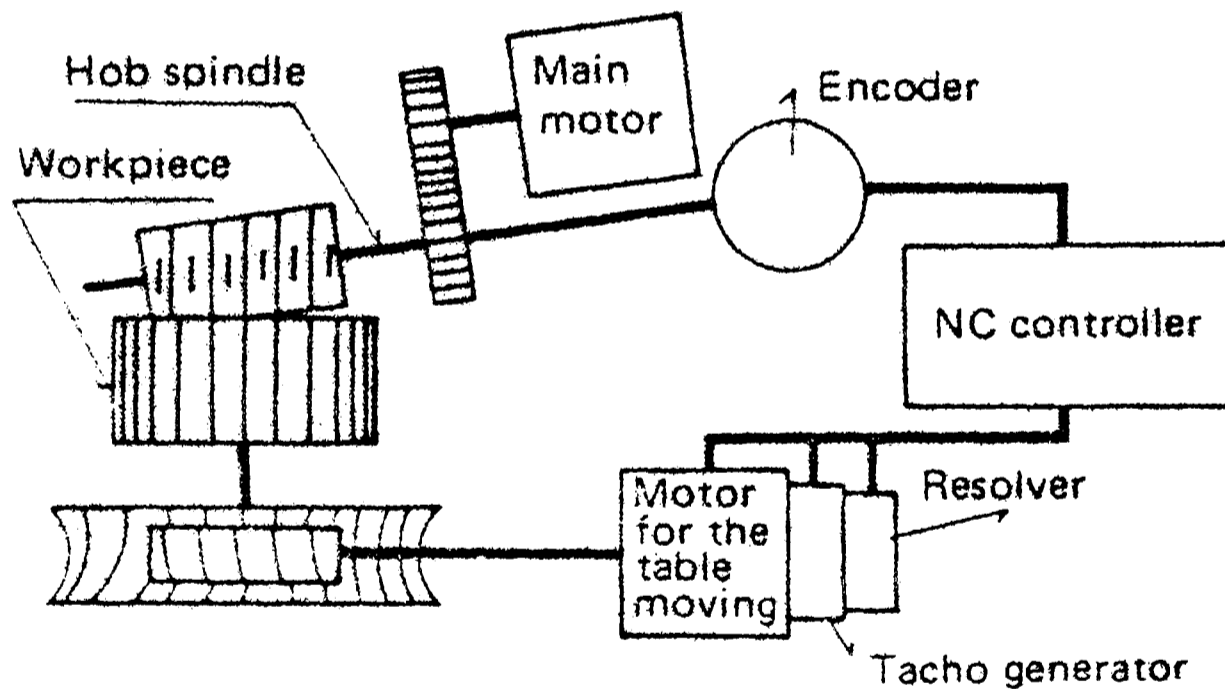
Gear train of a numerically controlled hobbing machine [Nagafune].
